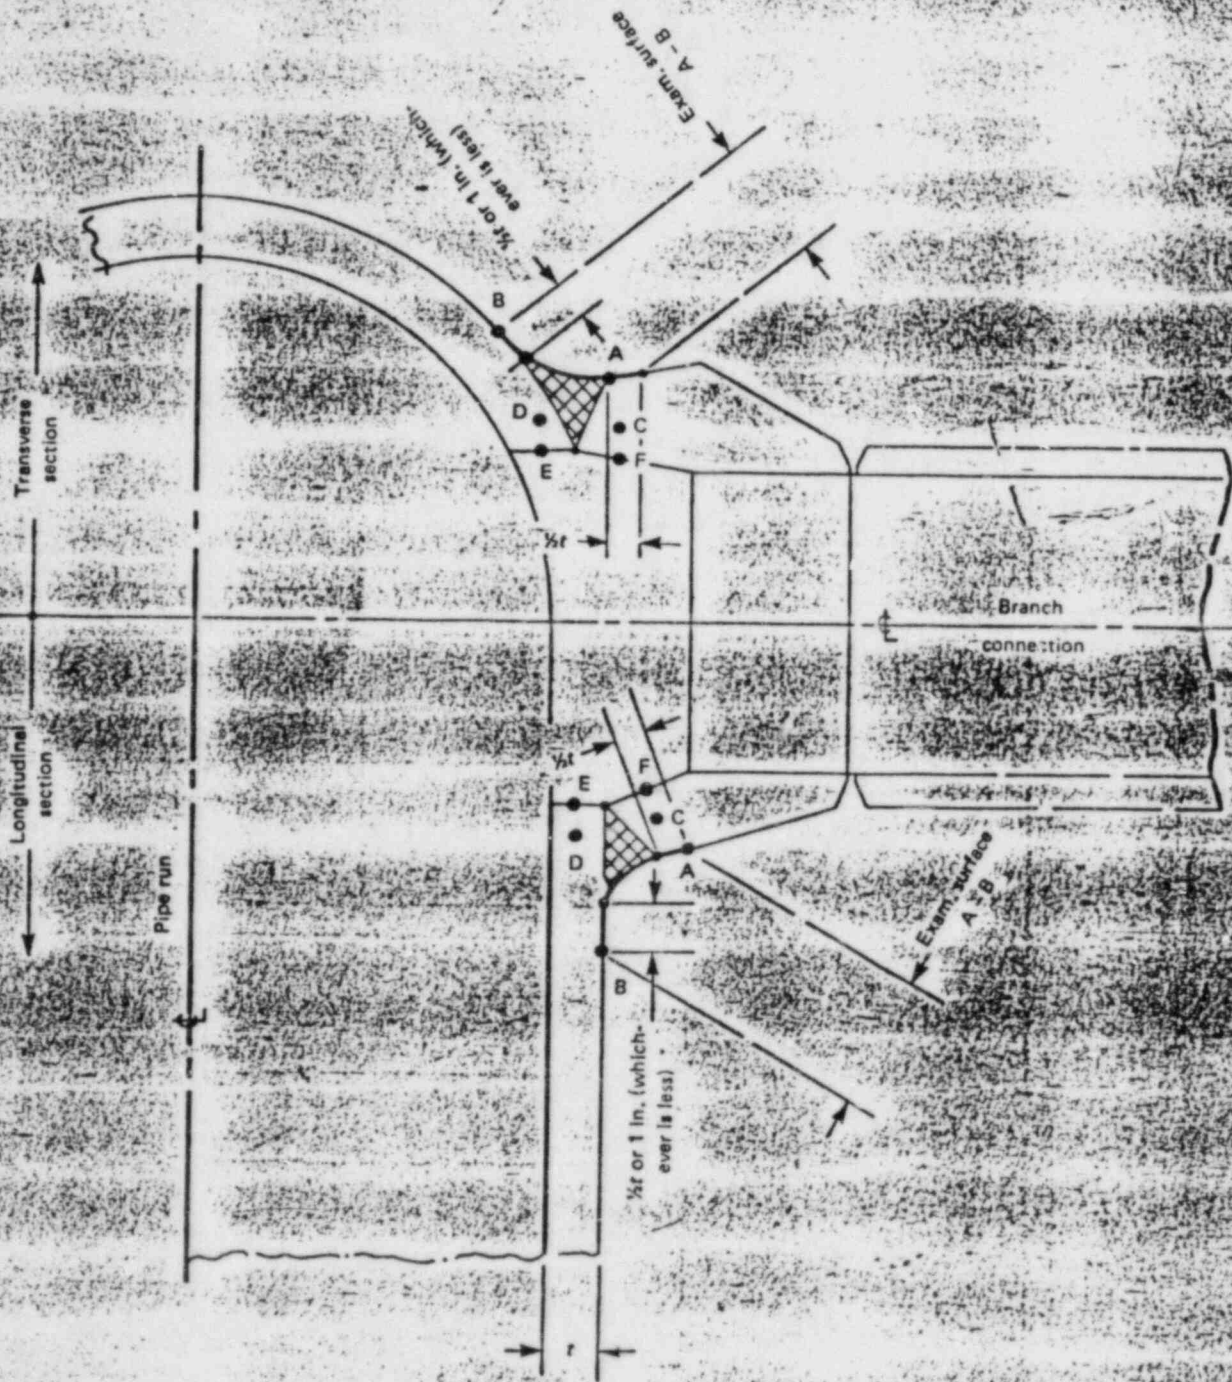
SIMILAR AND DISSIMILAR METAL WELDS IN COMPONENTS AND PIPING (CONT'D)
